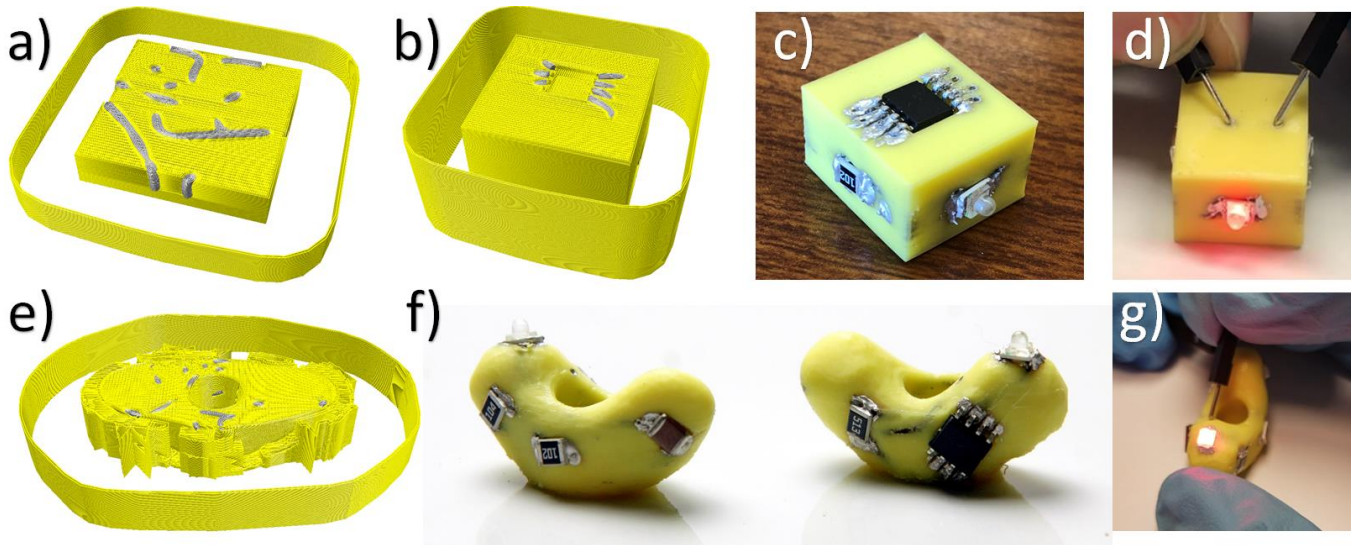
Sliced 3D 555-timer block circuit at (a) initial layer #26 and final (b) layer #280. Part (c) shows the 3DP model with electronic components and it is demonstrated in part d). The Holey Frijole mid slicing layer is shown in part e). Part f) displays the printed amorphous device, while part g) demonstrates it working.
